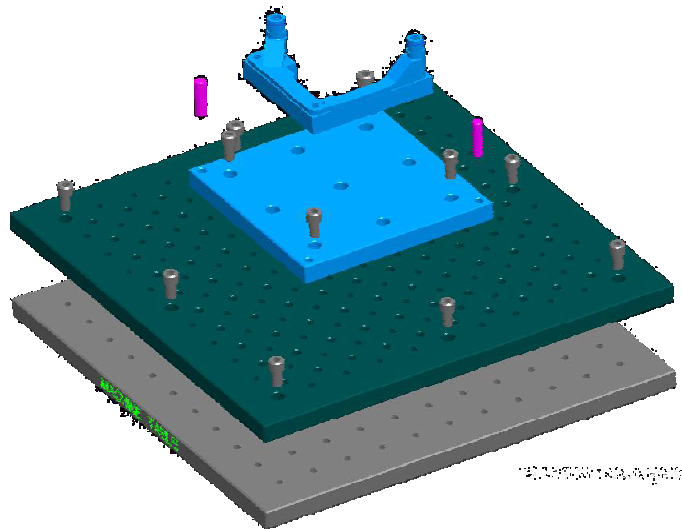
Assembly of LENS Substrate on Positioning Subplate and into Either the LENS Machine or the Finish Machining Center
